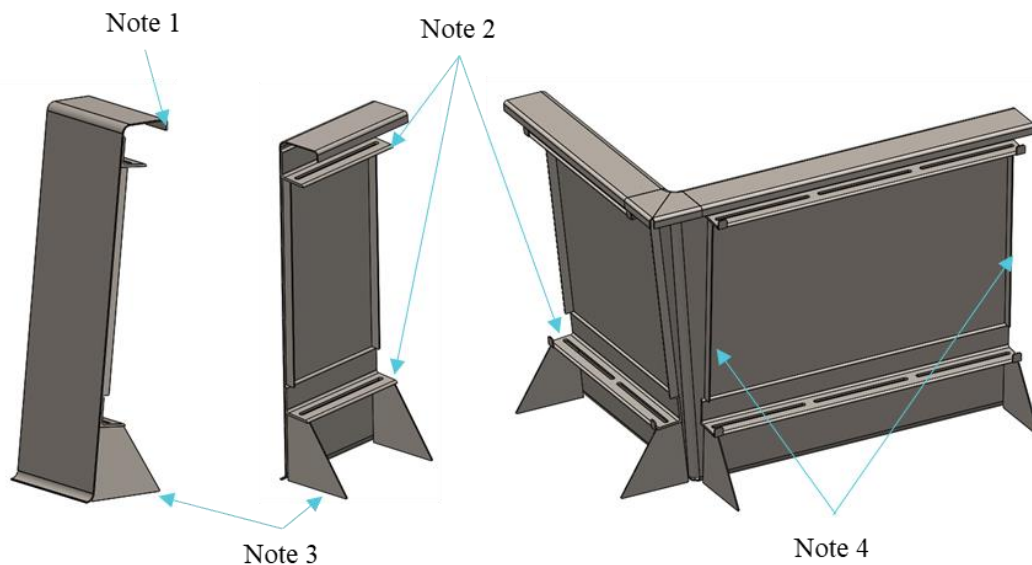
Detail views of the Modular Corner weld assemblies after the second EDR
